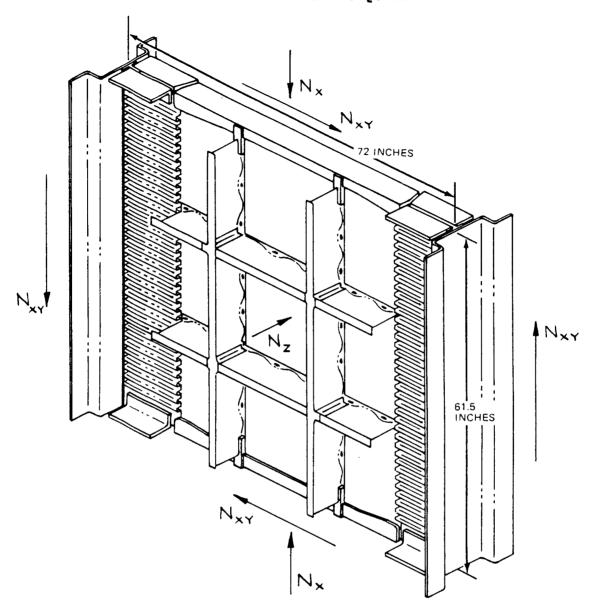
Z5943445 COVER PANEL COMBINED LOAD TEST SPECIMEN
